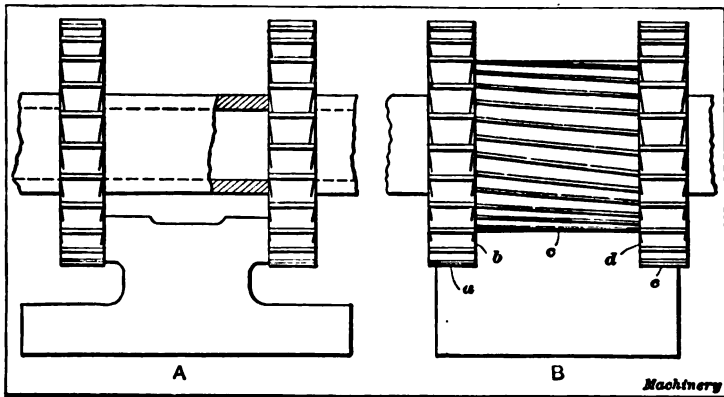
(A) Straddle Milling. (B) Gang Milling
